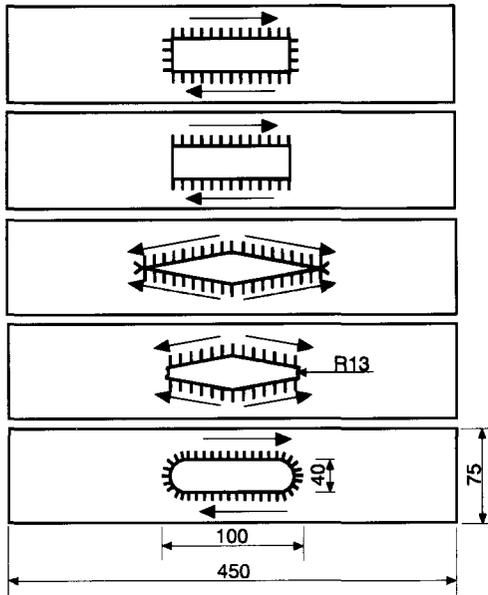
Details of the cover-plate geometries used in the work on the constant-amplitude loading of aluminium alloy I-beams (dimensions in millimetres). The welding directions are shown by the arrows. The welding was continuous for the fully welded oval and rectangular geometries
